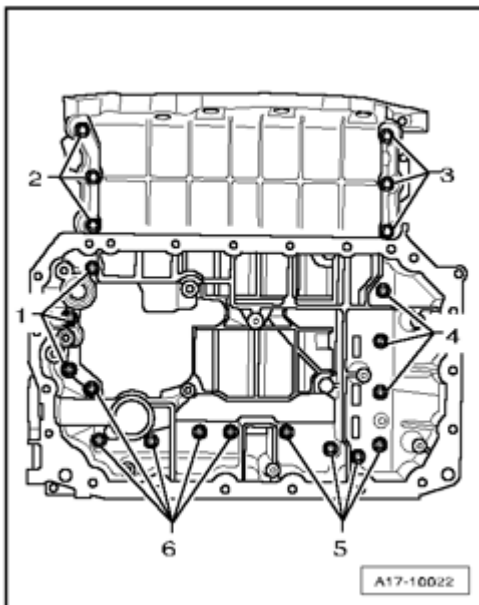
Removing/Installing Bolts For Upper Section Of Oil Pan
